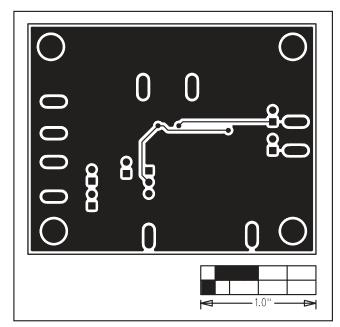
MAX6603 EV Kit PC Board Layout—Solder Side
